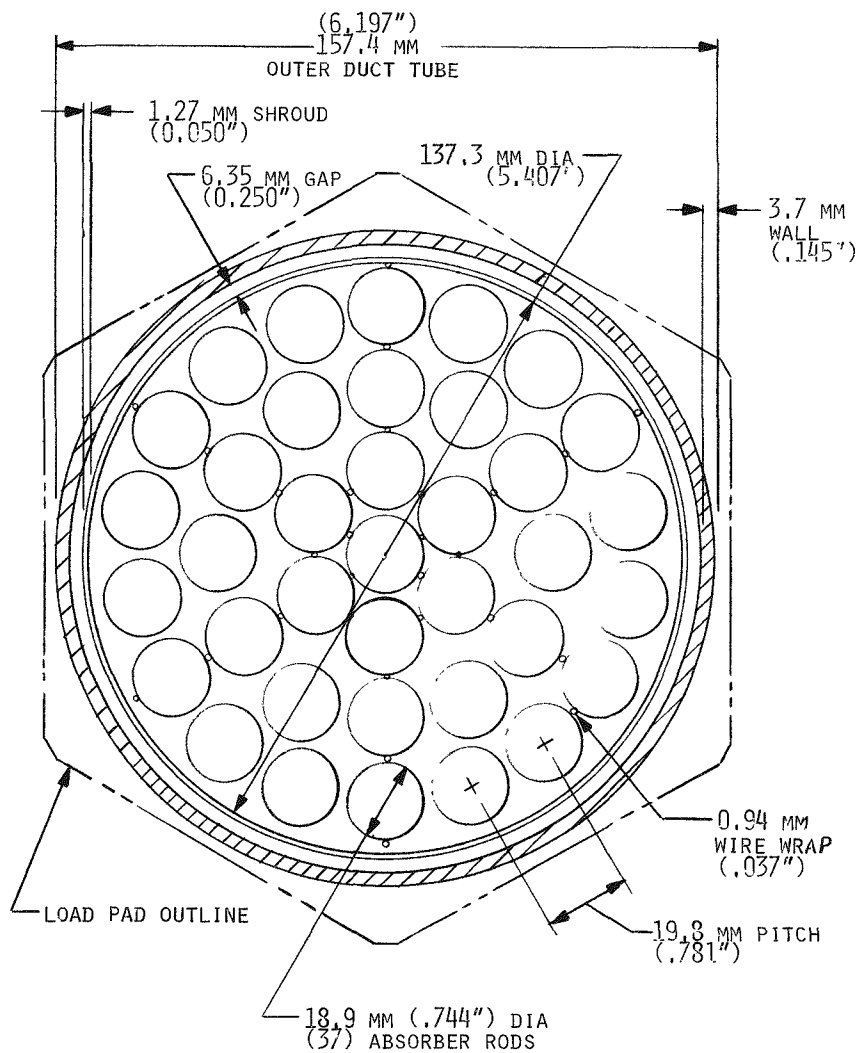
POISON ASSEMBLY PIN GEOMETRY
